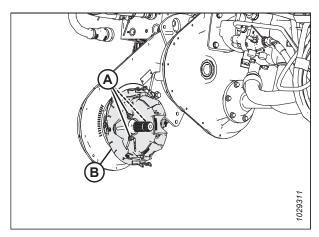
Completion Gearbox Chain Tensioner Cover
